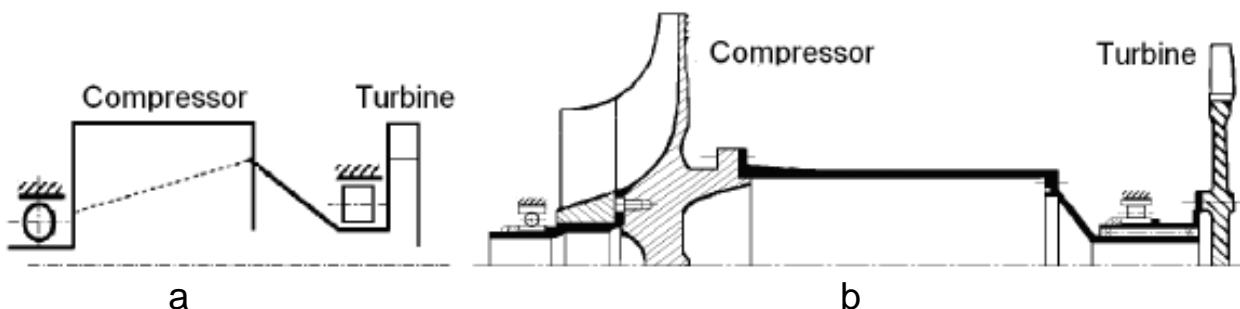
Two-support rotor with supports disposition before compressor and turbine: a – scheme; b – construction
